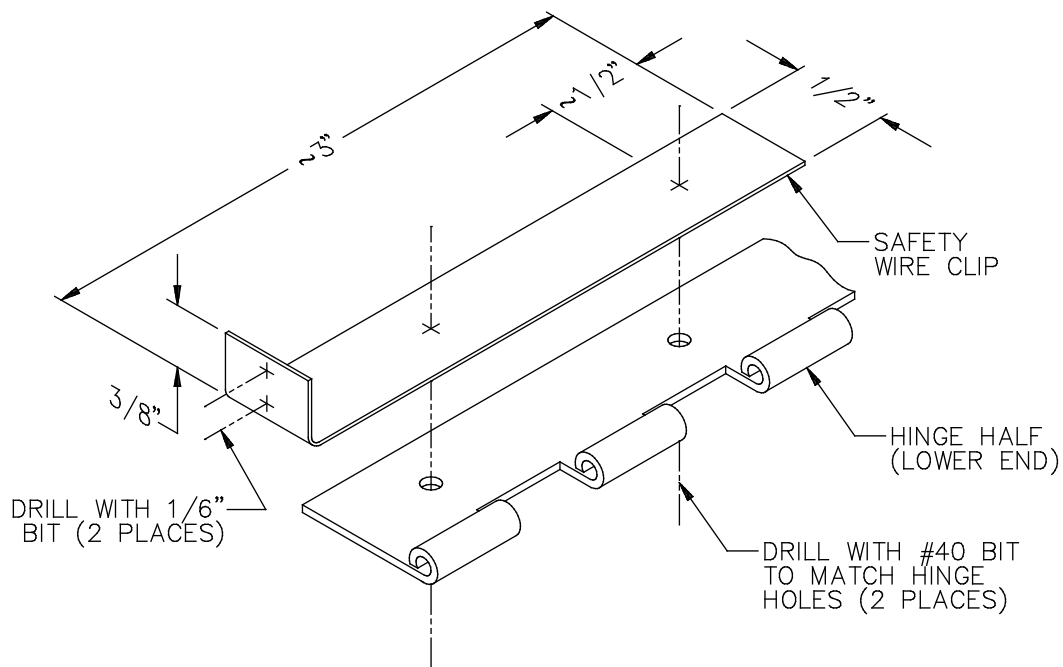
Fabricating the Hinge Pin Safety Wire Clip
